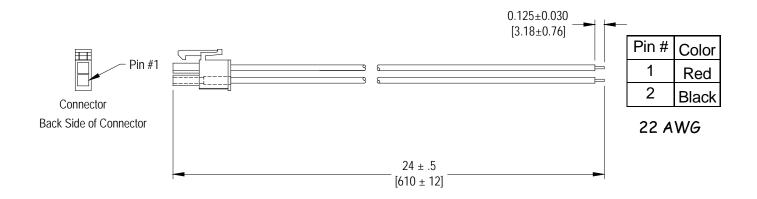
MOTOR POWER SUPPLY MATING CONNECTOR (P1)
